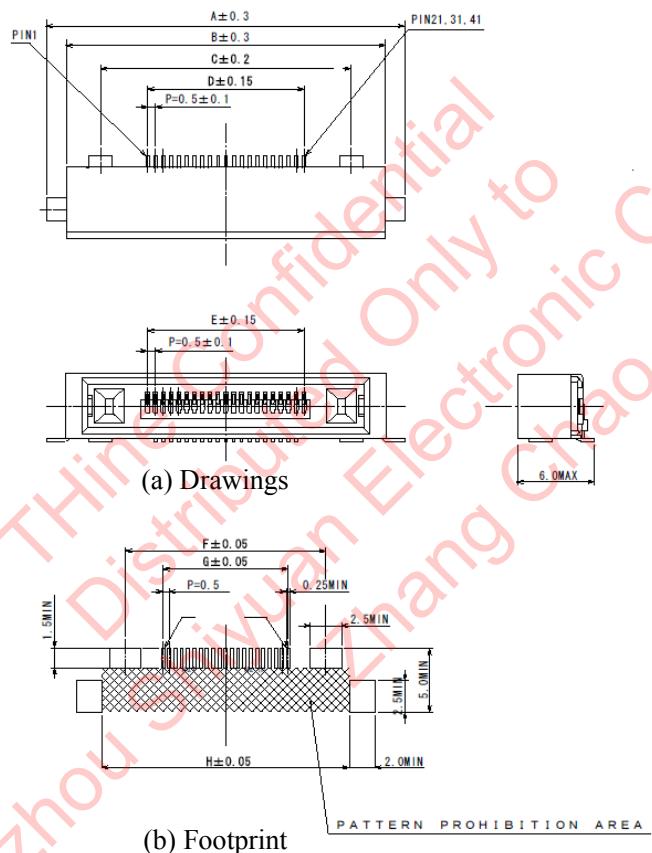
PCB Mount Receptacle Drawings (Recommended)
